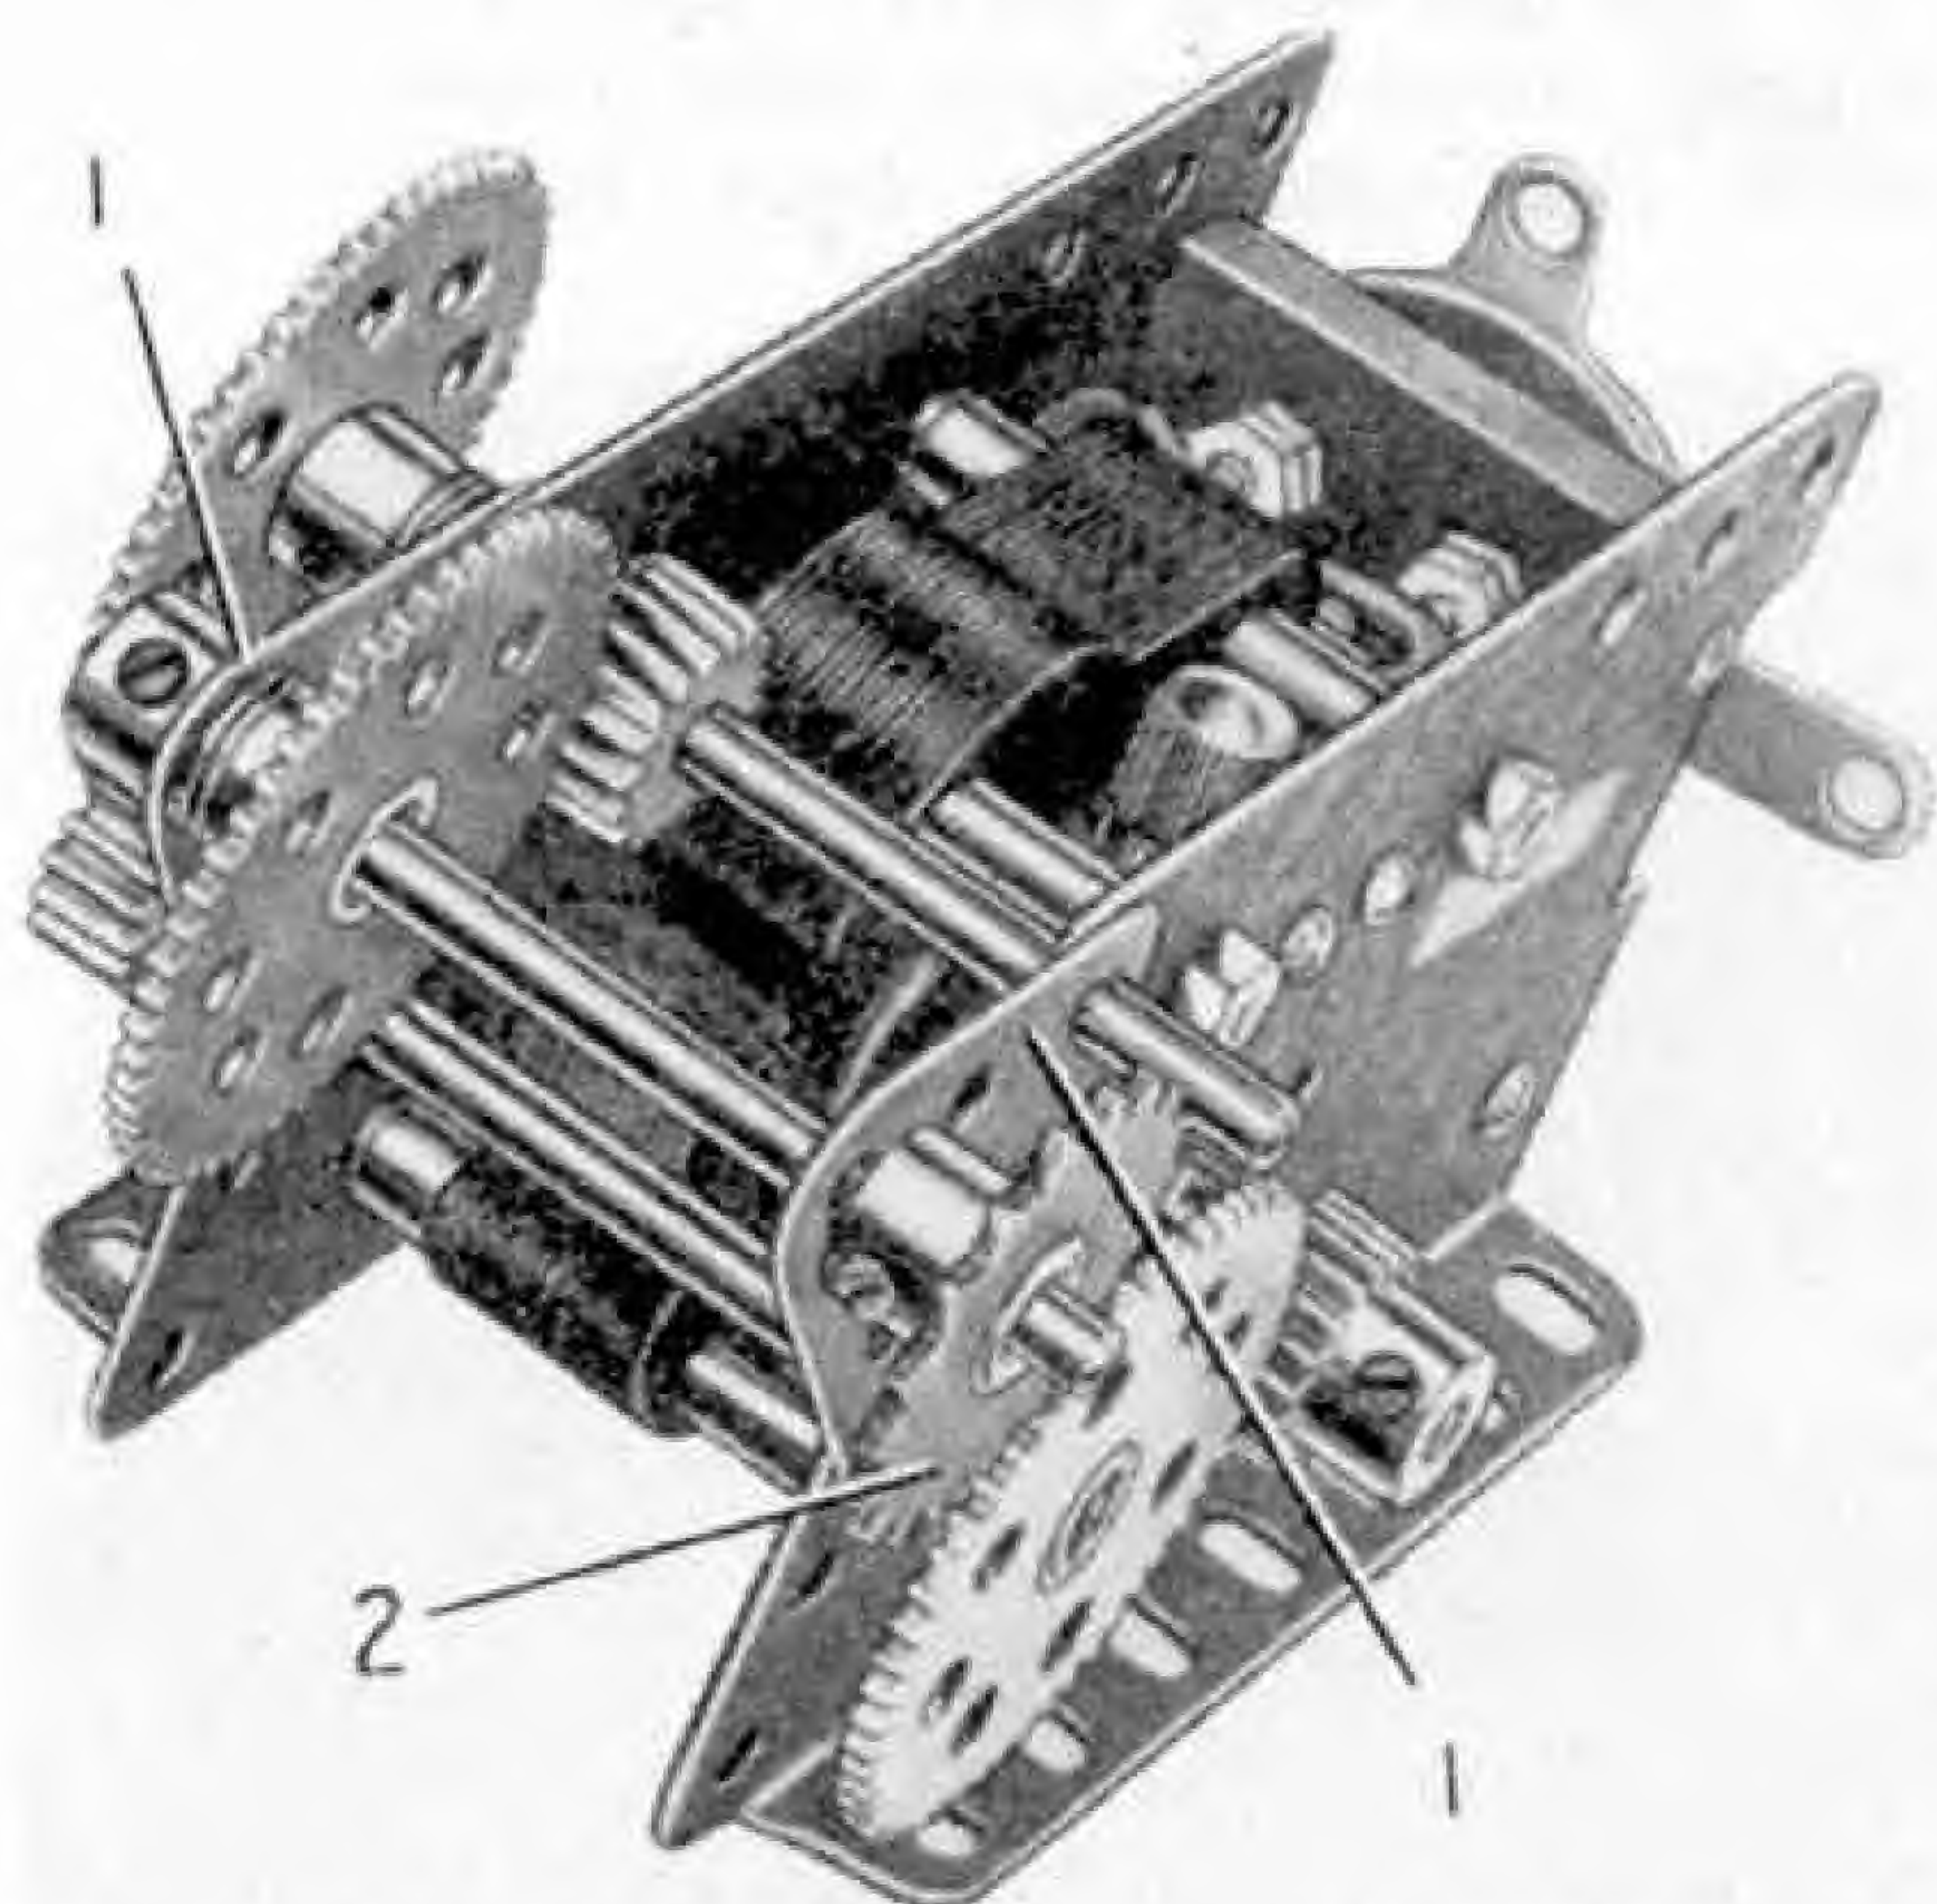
This view of the power unit of the Tower shows how the speed reduction gearing is fitted to the E20R Electric Motor.
